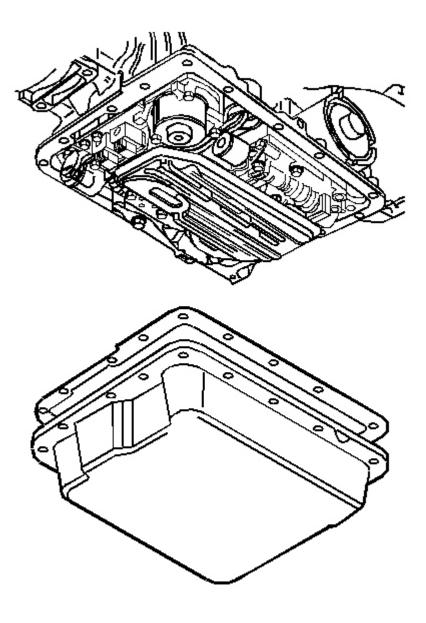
View Of Oil Pan & Gasket Courtesy of GENERAL MOTORS CORP.
